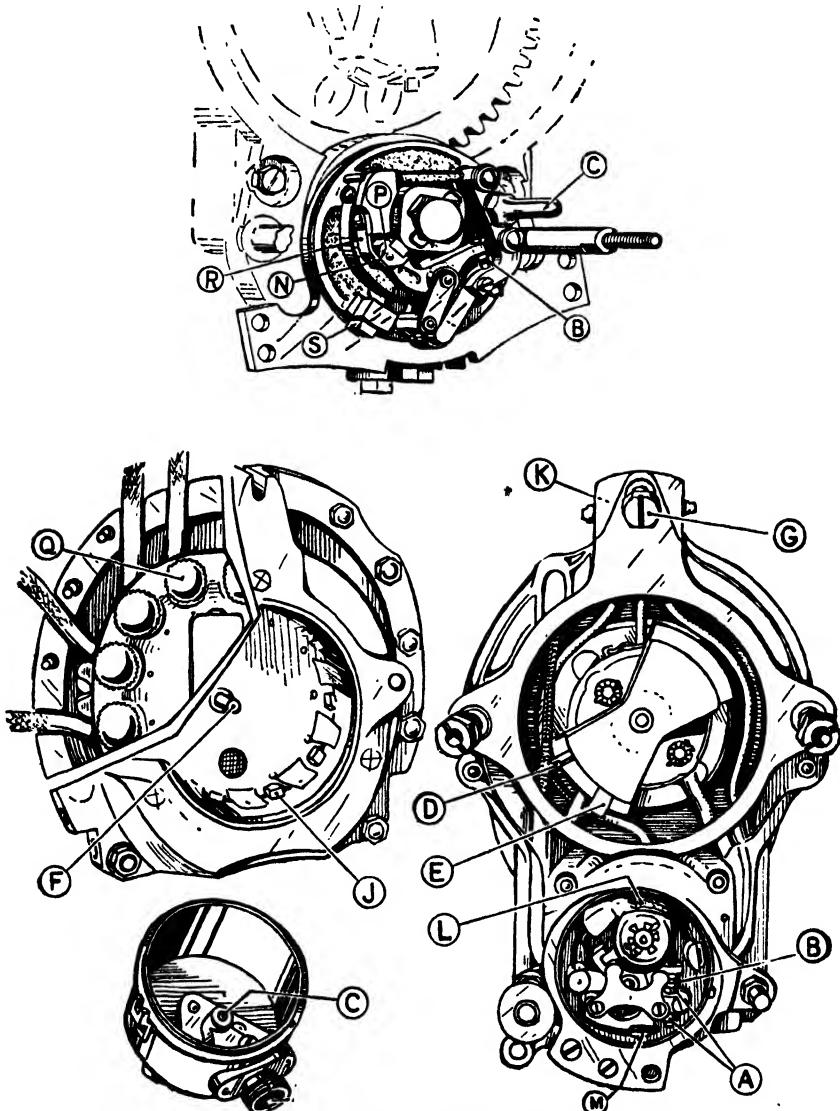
Magneto Contact Breaker with Distributor Removed.
